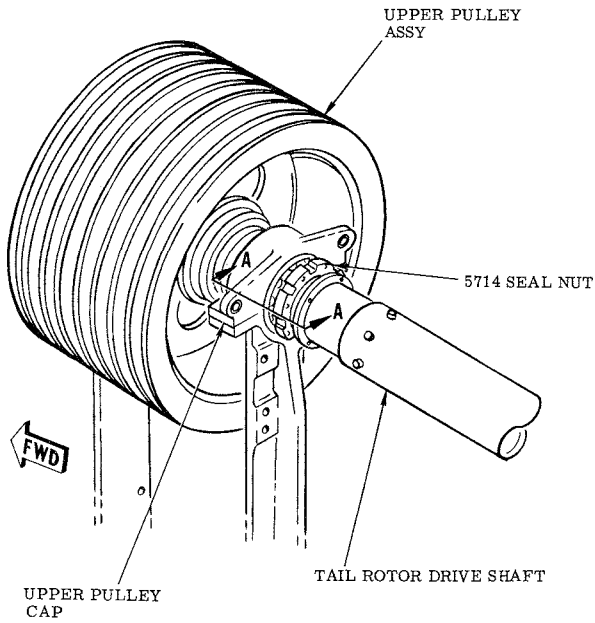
INSPECTION-TAIL ROTOR DRIVE SHAFT, EXCESSIVE END PLAY
